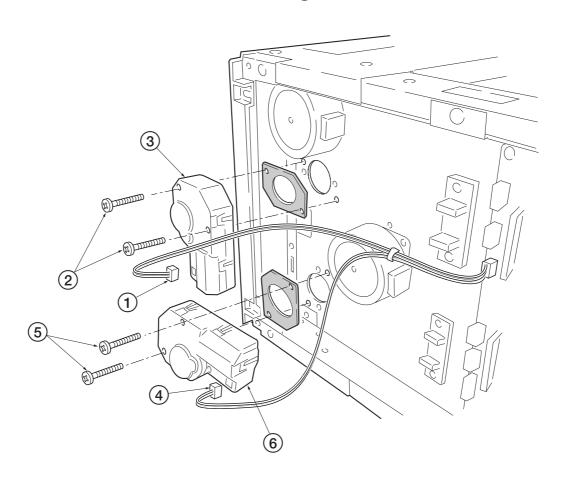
Removing the upper and lower cassette base elevation motors
